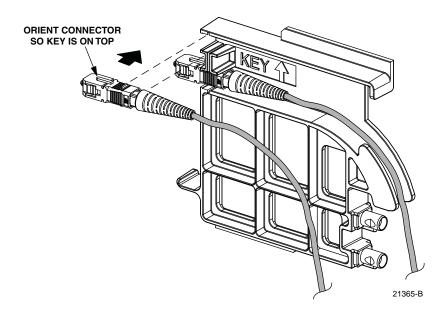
Installing Patch Cord Connector in Dust Cap Assembly
